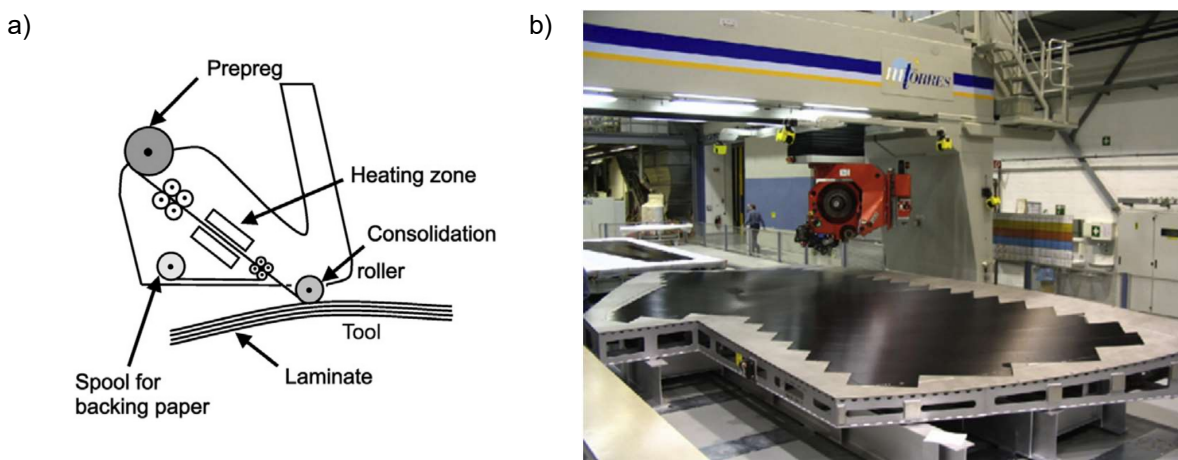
a) Schematic of an ATL layup head [23] b) Gantry type ATL machine, laying prepreg material onto an open mold [24]
